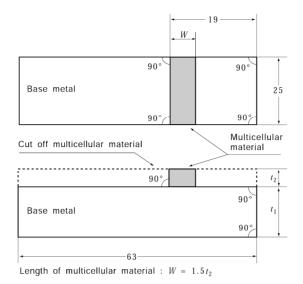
Size and Dimensions of Shearing Test Specimens (unit: mm)
